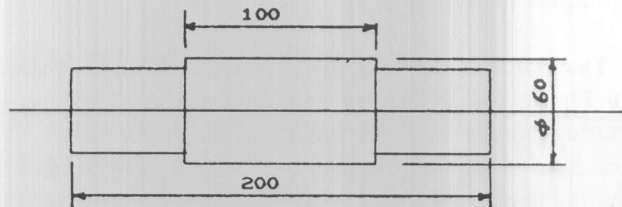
The workpiece used for the determination of the optimum cutting conditions.
